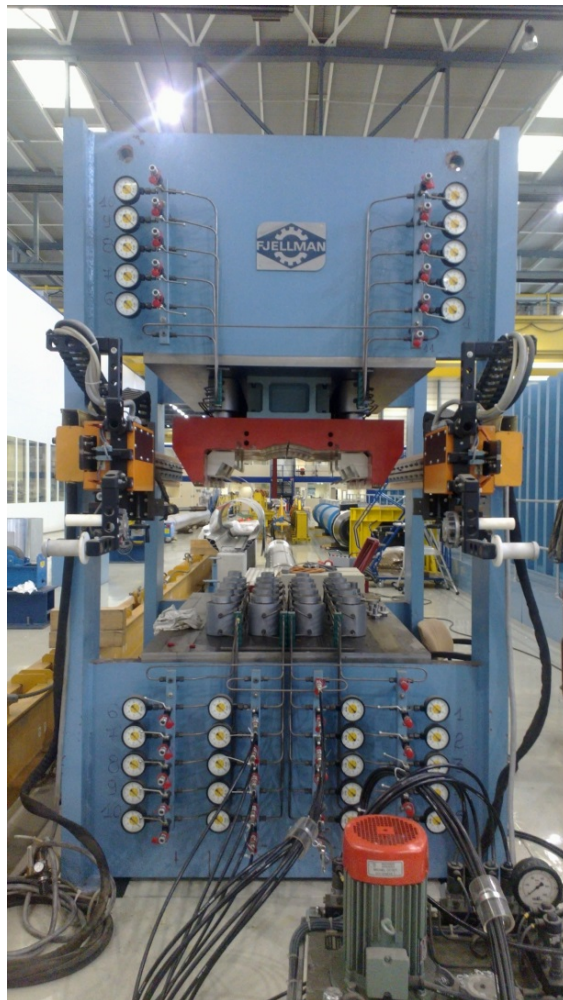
The unmodified press in August 2012. The welding robots can be still seen on the girders. They were removed and the press will get new robots after validation in 2013. Also the press includes the old manometers six hydraulic circuits including five cylinders each.
